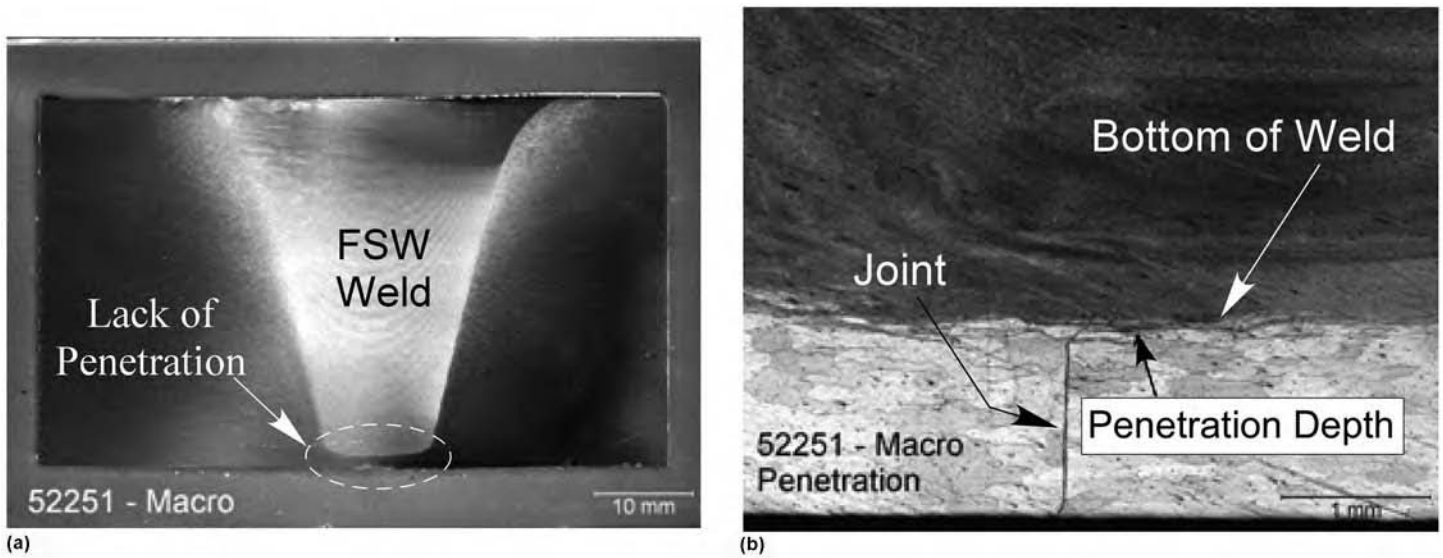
Macro sections showing (a) lack-of-penetration (LOP) defect in a friction stir weld (FSW) aluminum part and (b) magnification (25×) of the LOP defect
